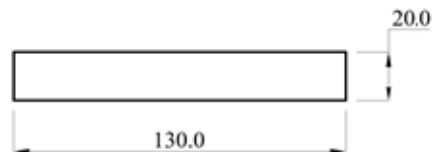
Tensile Specimen Dimensions as per ASTM D-3039
